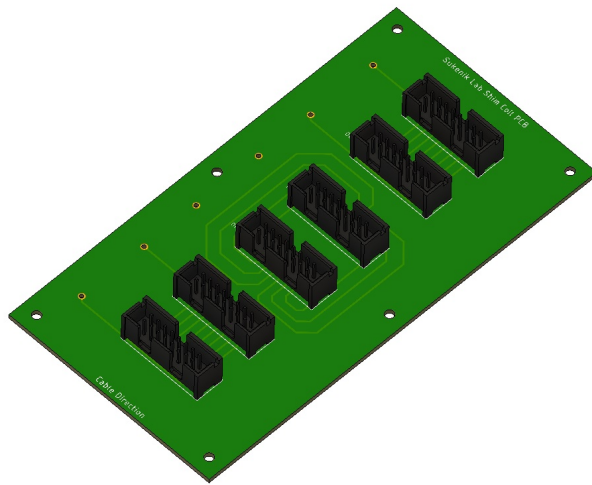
Magnetic shim coil PCB created by Josh Frechem. Three shim coils can be connected on each PCB.
